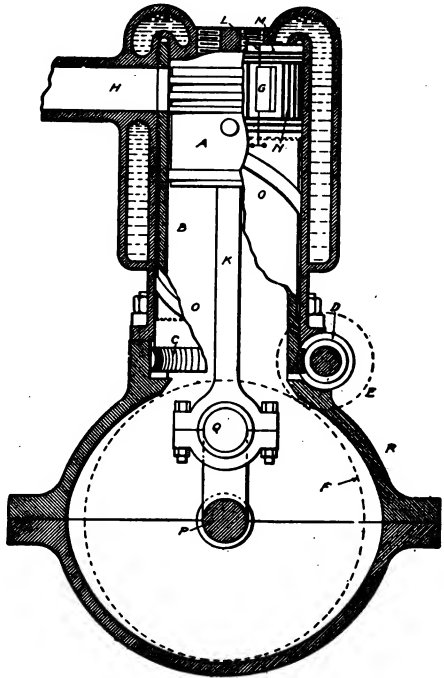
Section through Ledru (French) Camless Engine. The Rotary Gear-Driven Sleeve Displaces All Cams
